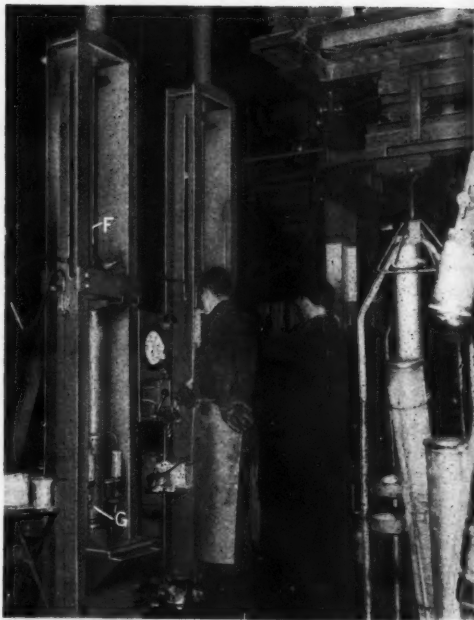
The welds are subsequently tested for porosity on hydraulic rigs of the design here shown, at a pressure of 3,000 lb. per sq. in. Fluid used for testing is admitted through the sealing-plug and ram
